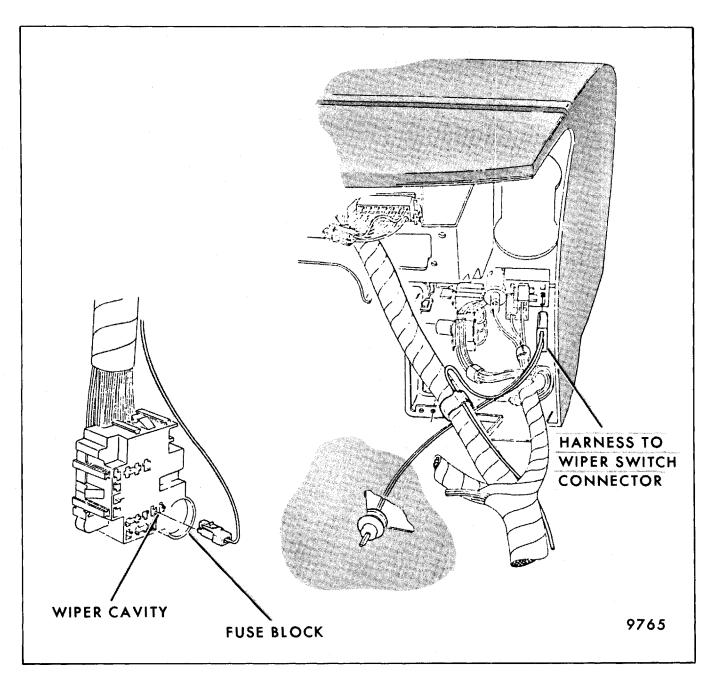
Windshield Wiper Switch Installation - Pontiac A Styles
